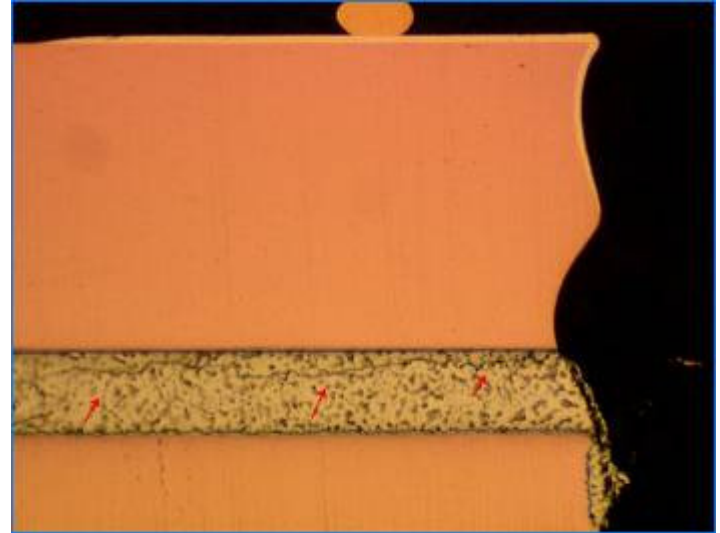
cross section, SN67, U54, left lead solder crack, 200xb
